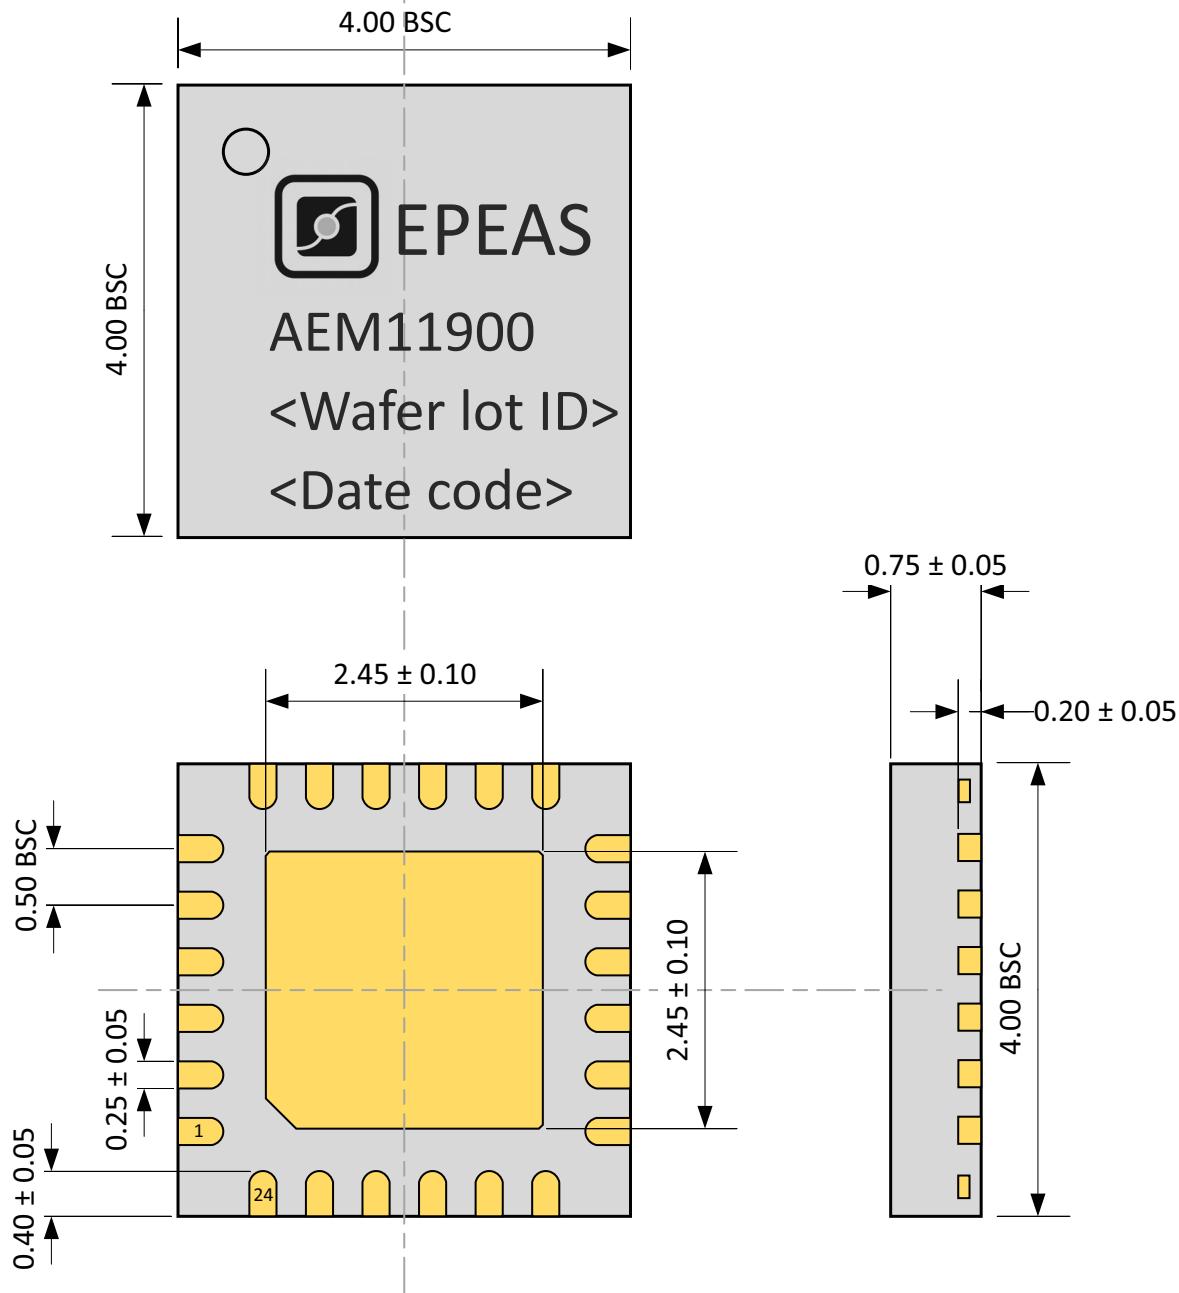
QFN 24-pin 4x4mm drawing (all dimensions in mm)
